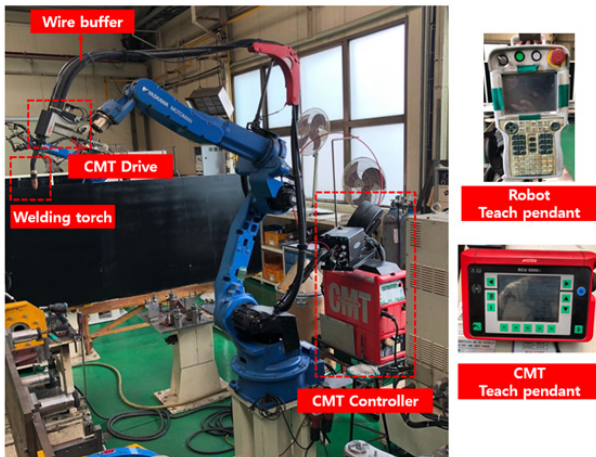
Equipment used for CMT welding experiments on ultra-high strength steel plates
